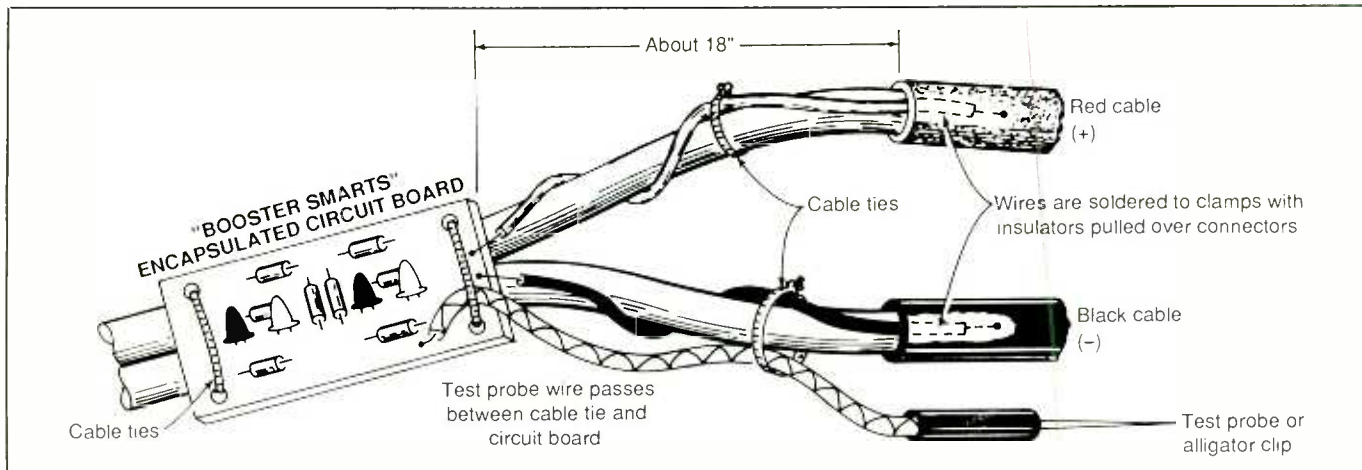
Booster Smarts circuit-board assembly mounts directly to jumper cables with two plastic cable ties. Label cable clamps at end nearest project assembly "GOOD" and at other end "DEAD" for identification purposes.
